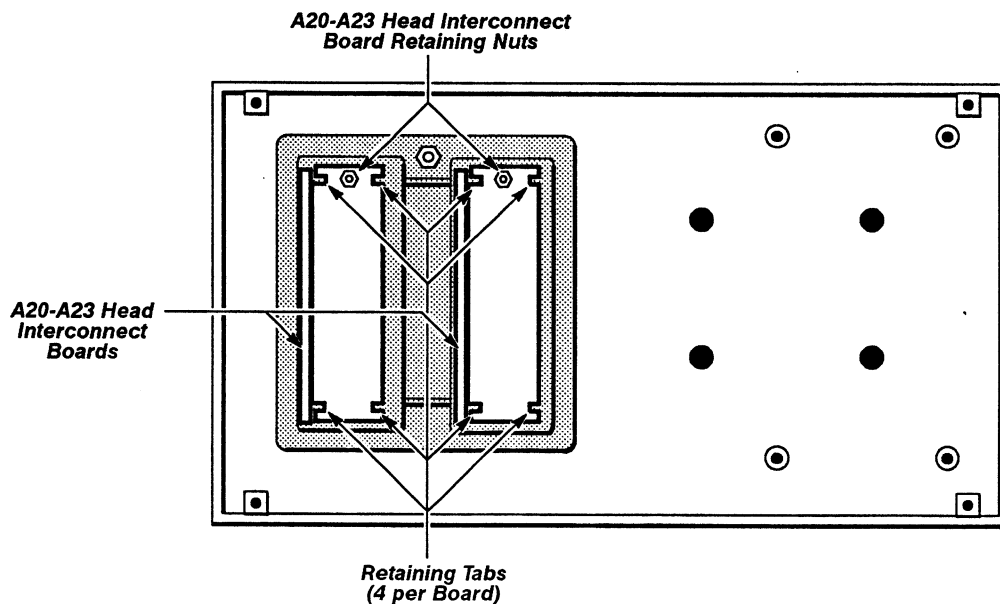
Removing and Replacing the Front Subpanel Assembly
